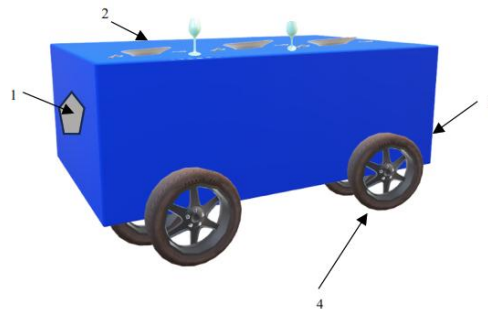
Mechanical Design of the Food Delivery Robot Prototype
